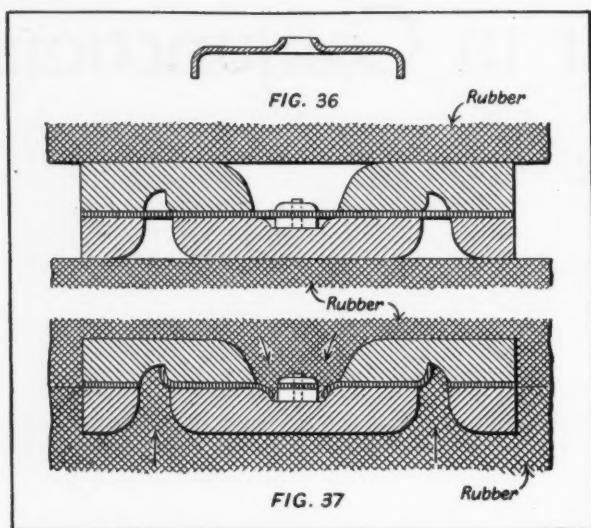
Sectional View of Part that Requires Flanging in Two Directions. Fig. 37. Set-up for Producing the Part Shown in Fig. 36
